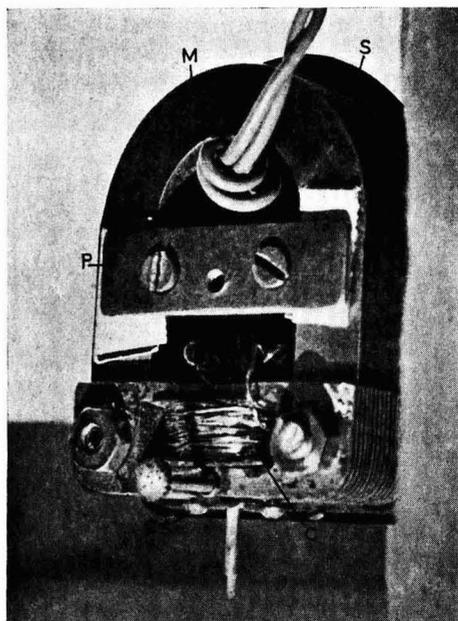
CONSTRUCTIONAL DETAILS OF THE CUTTERHEAD [C, coil; CS, clamping screws; M, magnet; P, bridge plate; and S, ebonite sheet]
